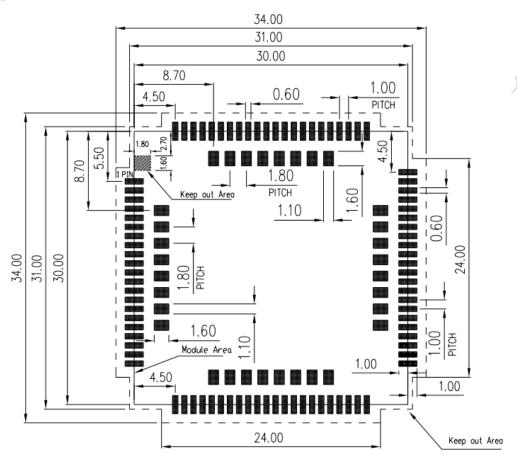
Recommend PCB footprint Dimension (Unit: mm)
